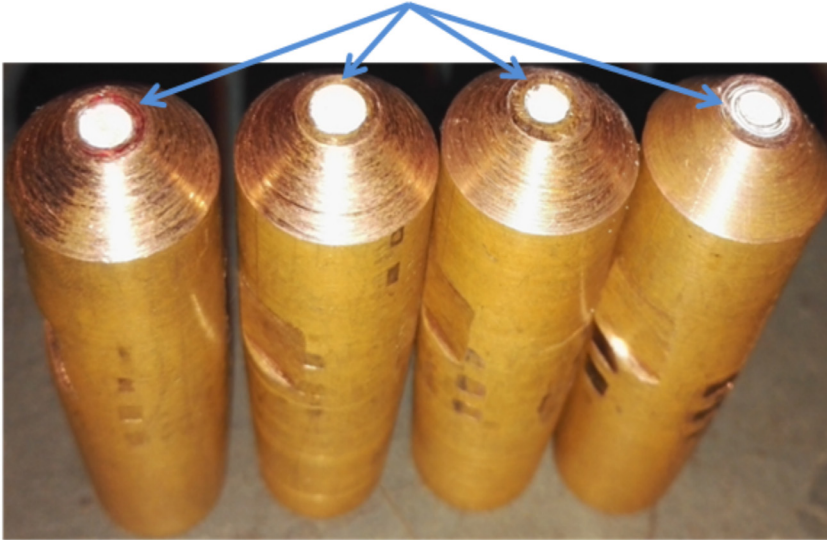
Annular recess spot welding electrodes used in the study.
